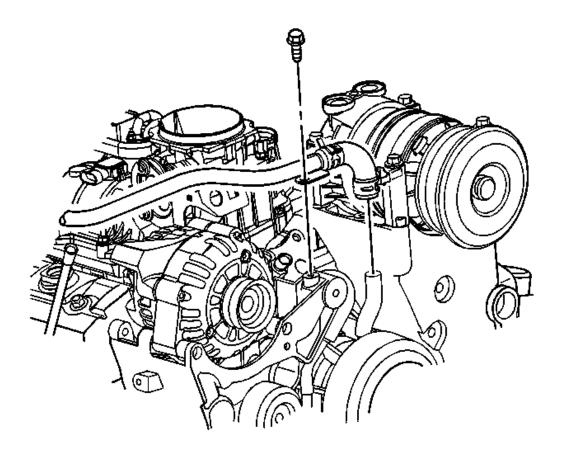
View Of Heater Outlet Hose & Clamp Courtesy of GENERAL MOTORS CORP.
